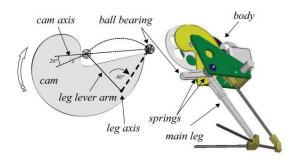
7g Jumping mechanism prototype capable of heights up to 1.4 m
